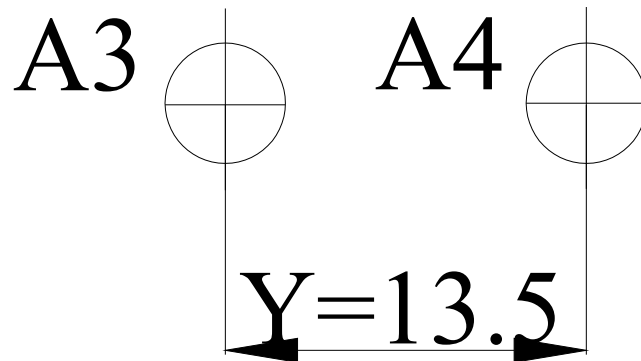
Minimum axis distance on multispindle SUHNER head MH 203
